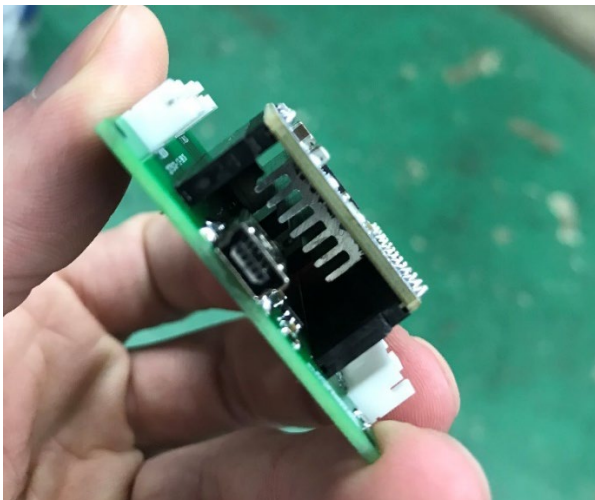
Picture of assembled PSU control board with heatsink installed on the underside of the motion controller to prevent the integrated motor drivers from overheating. The heatsink used passive cooling.
